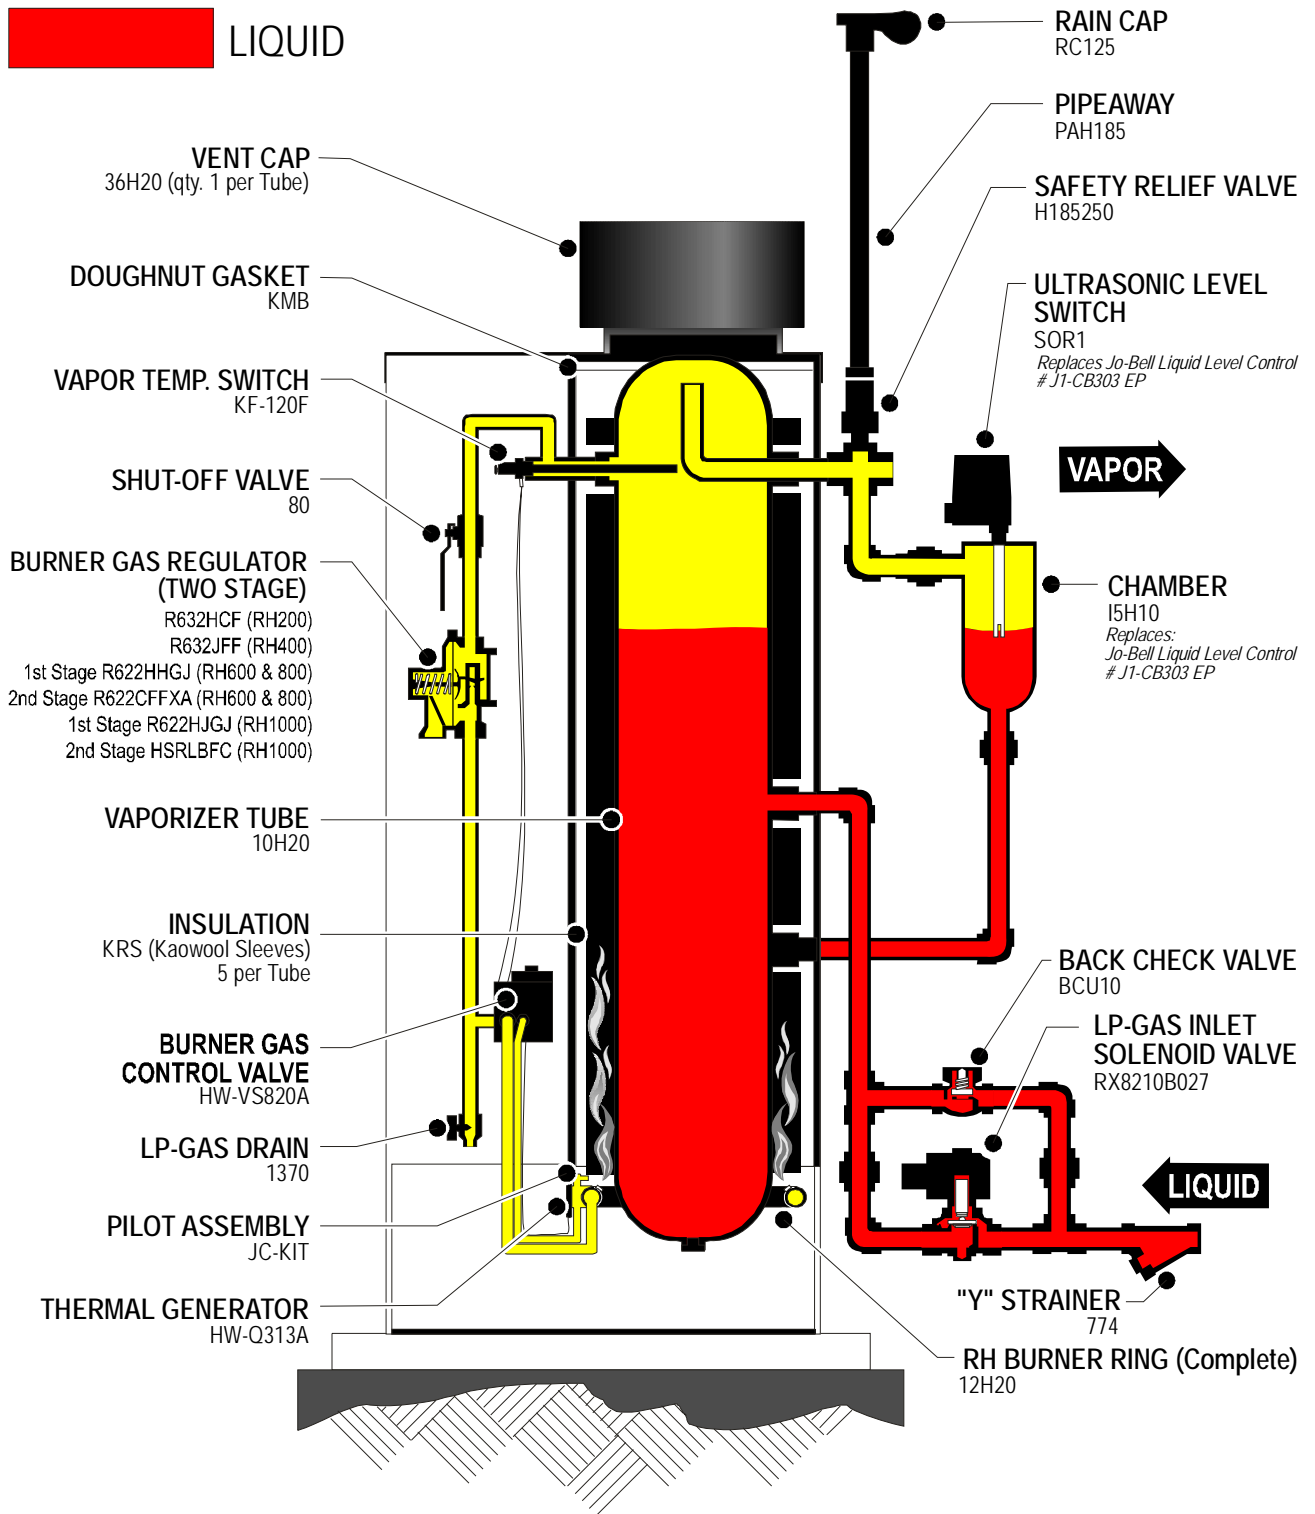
R200 thru RH 1000 Cutaway Drawing
